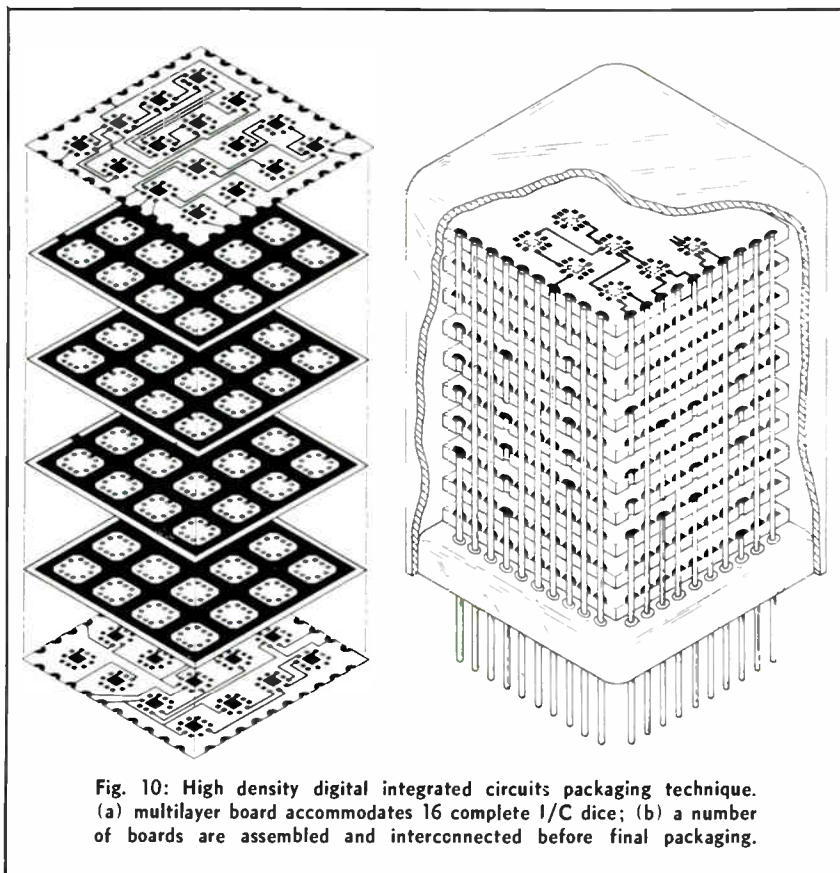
High density digital integrated circuits packaging technique. (a) multilayer board accommodates 16 complete I/C dice; (b) a number of boards are assembled and interconnected before final packaging.
